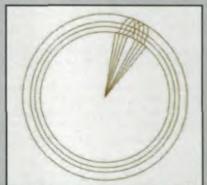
Gear tooth copies. Courtesy of Meritor Automotive.
